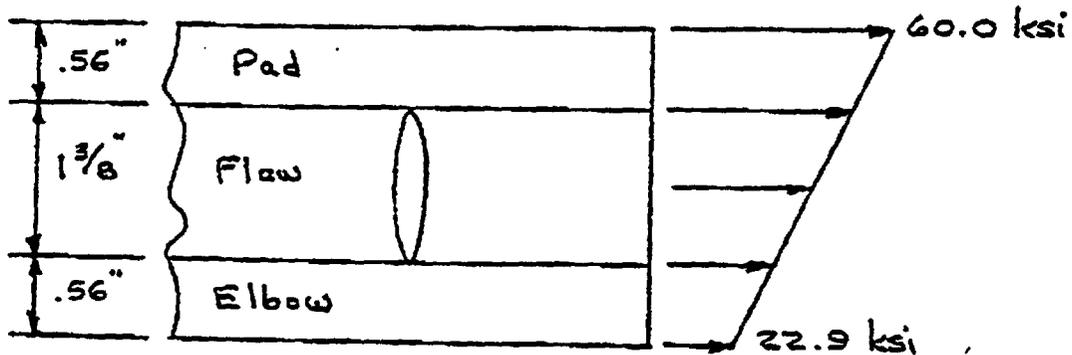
Embedded Flaw Model for Weld Pad
